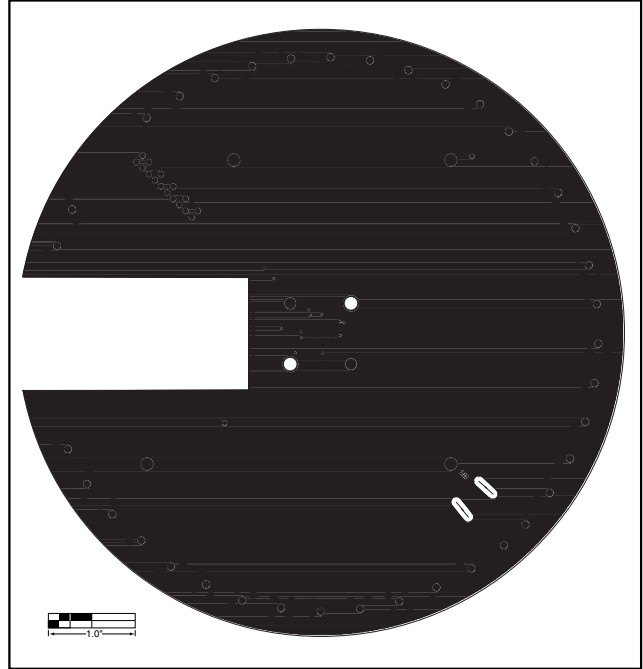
MAX3953 EV Kit PC Board Layout—Ground Plane
